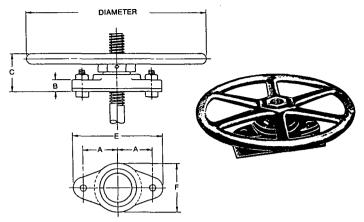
Construction drawing for jack lift (dimensions in mm).
